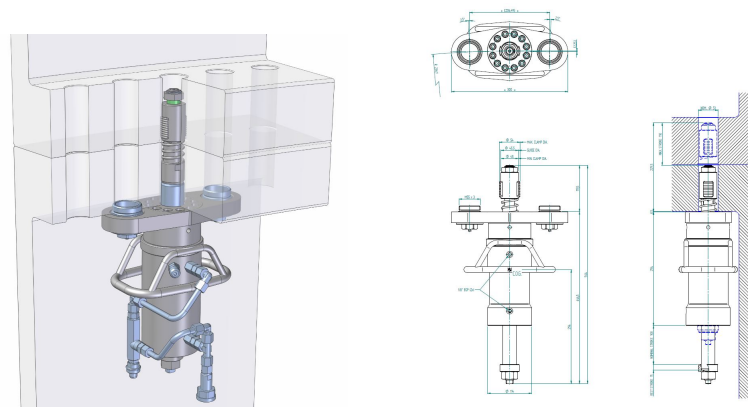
Tower Flange Clamp: mechanical sections and application view (IHC)
